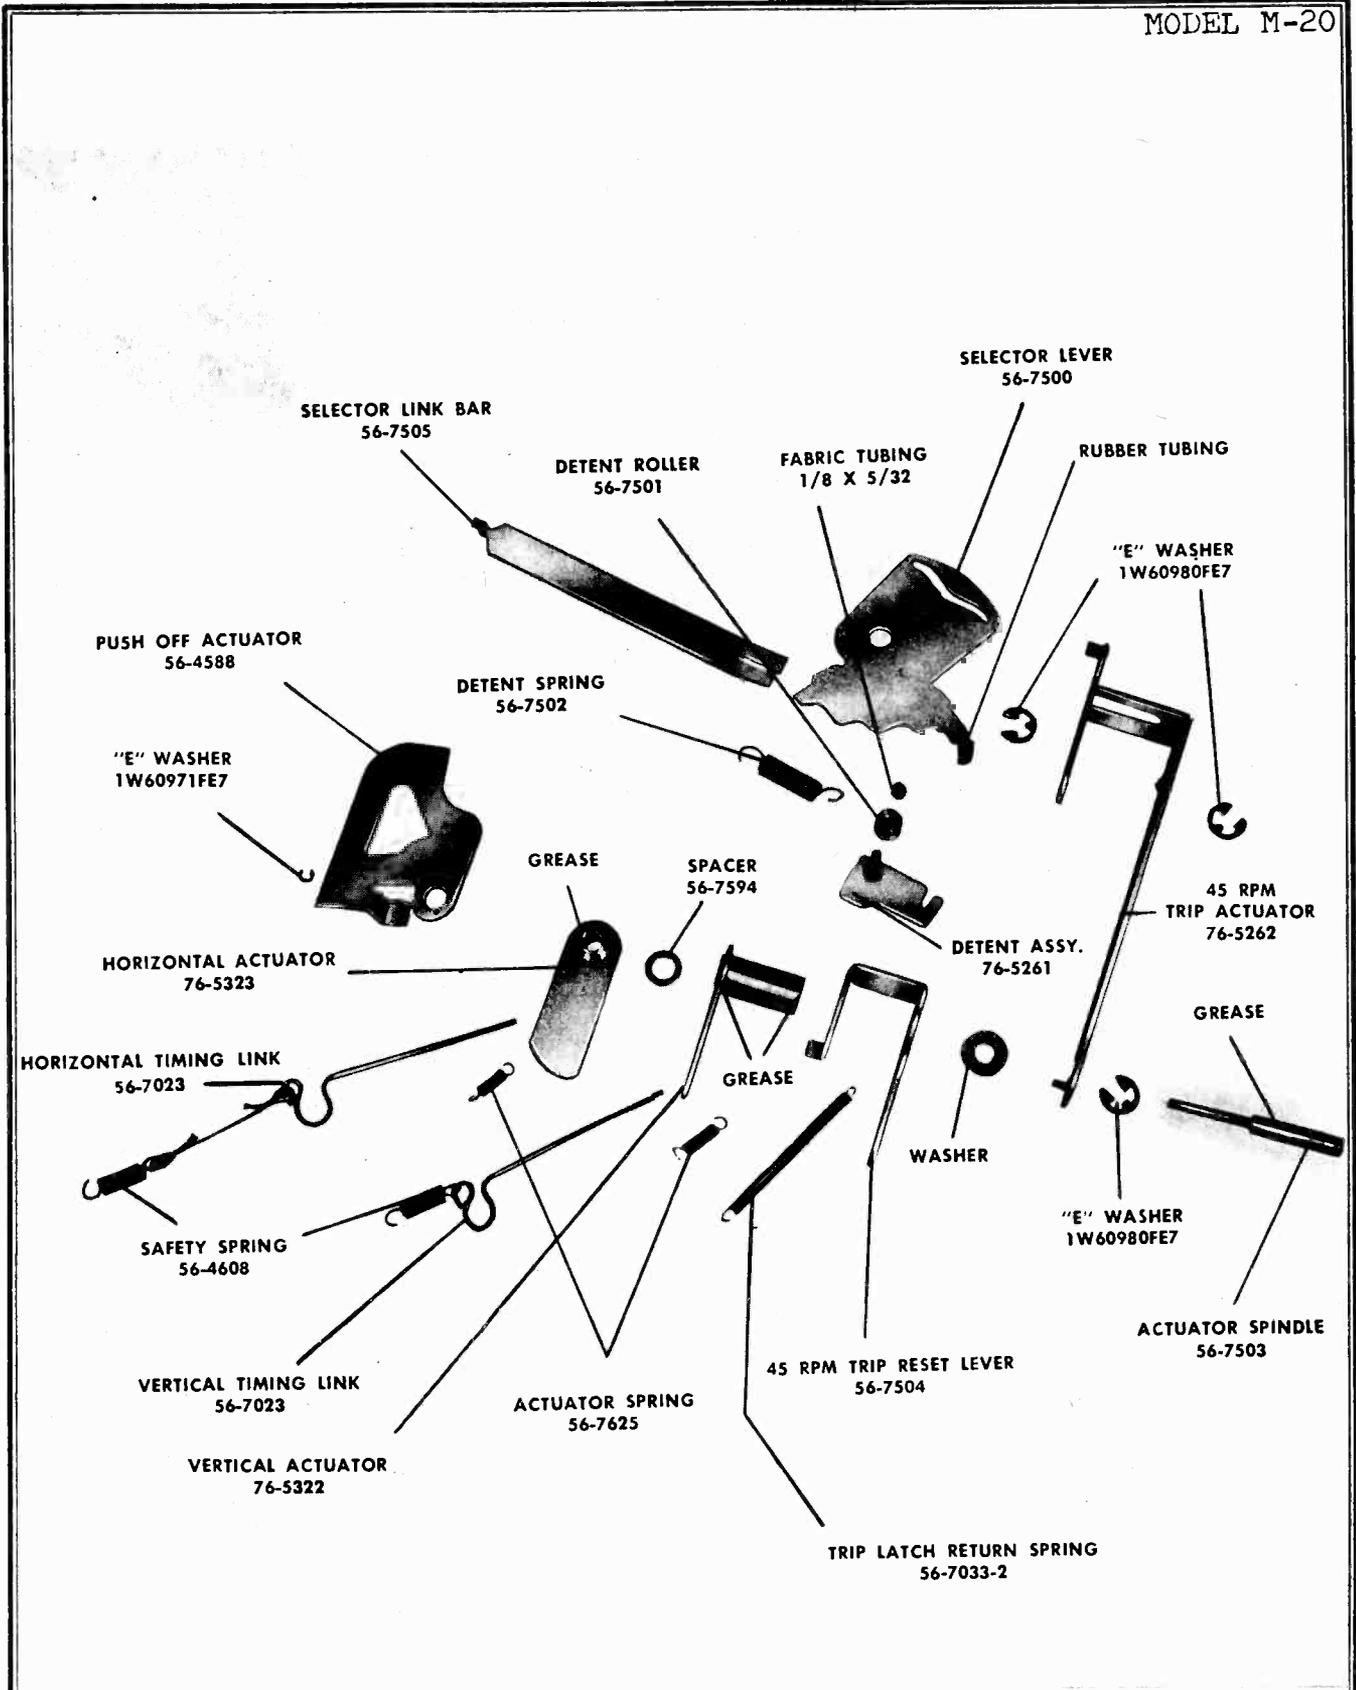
ACTUATOR AND SPEED-CHANGE ASSEMBLIES
